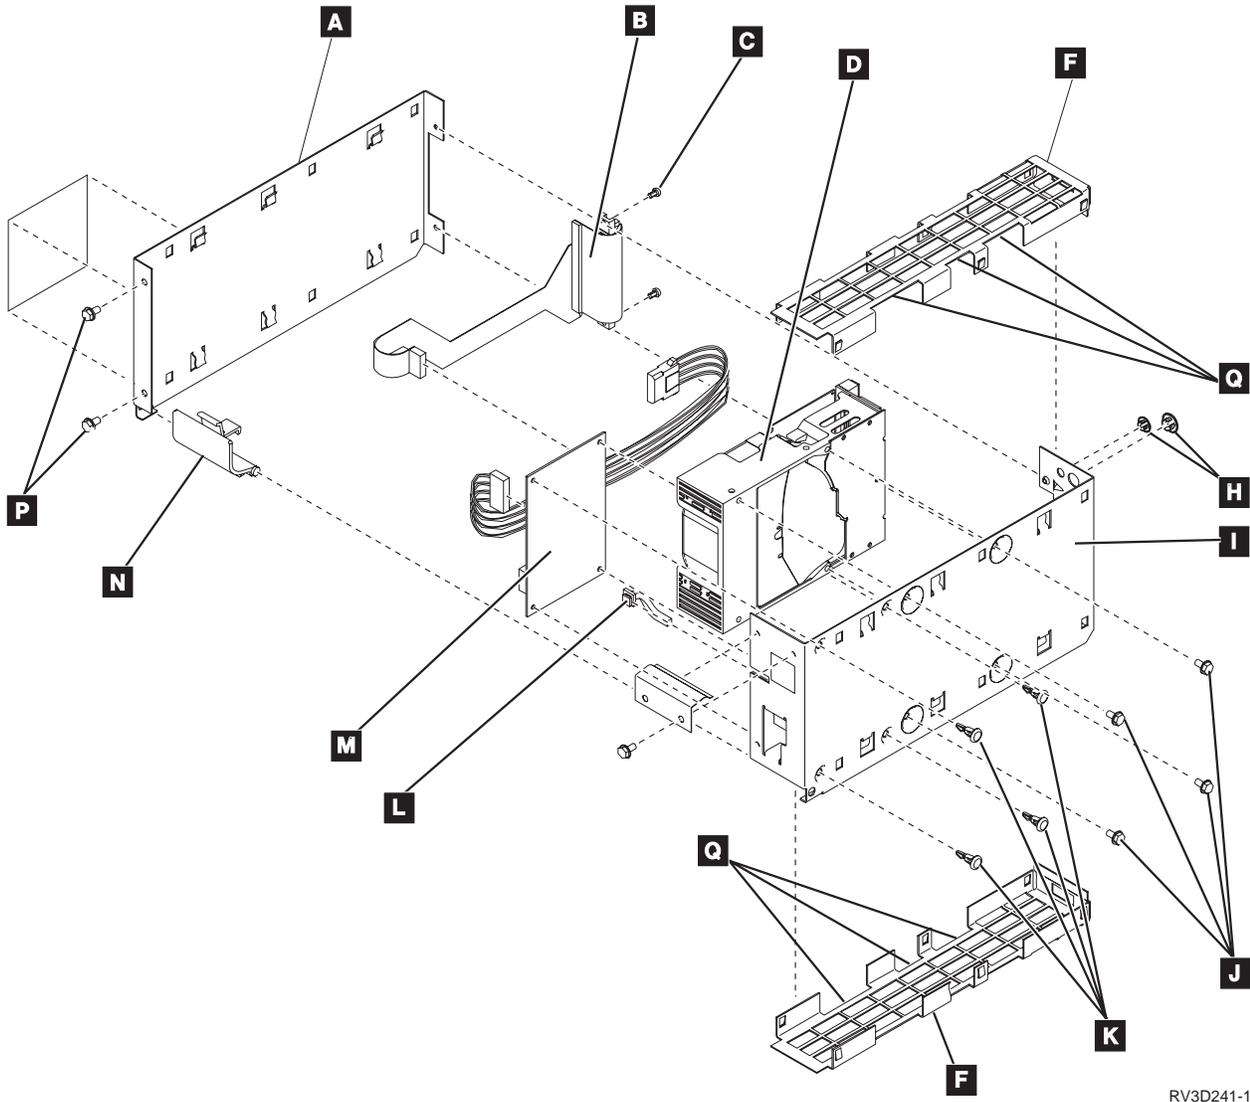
New style disk unit tray assembly for the 6602 type disk.
